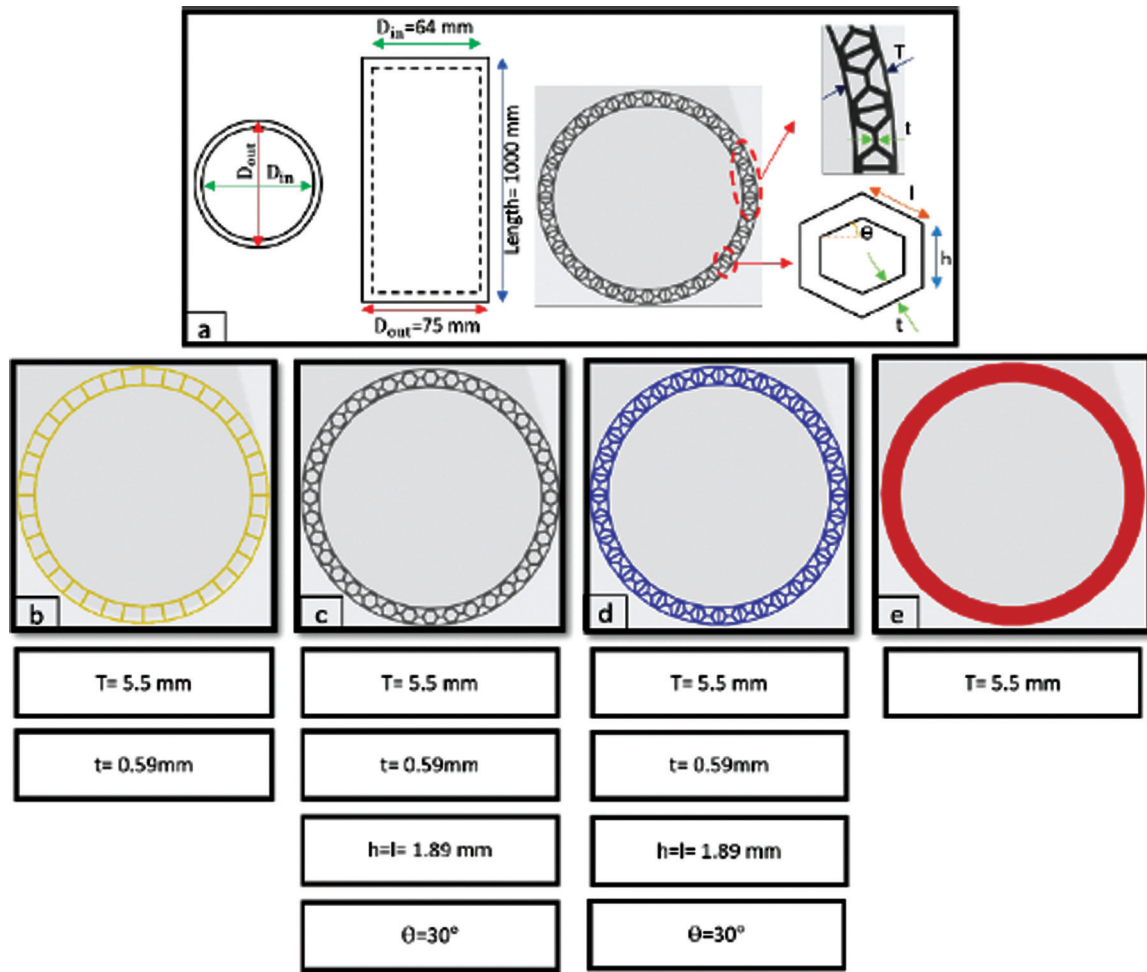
Dimensions and CAD views of designed pipes, a) dimension of pipes, b) rib-shaped pipe, c) honeycomb pipe, d) hybrid pipe, e) fully solid pipe.
